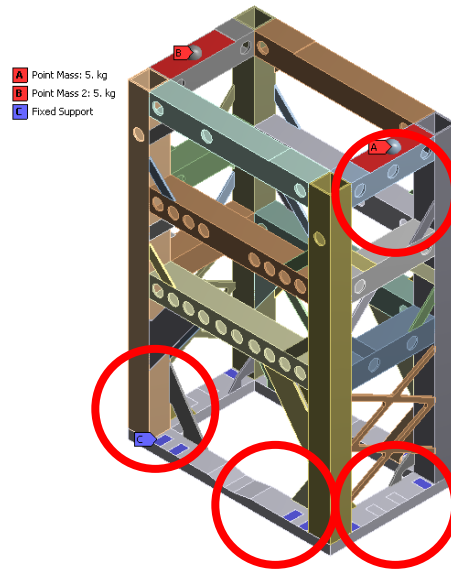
HLTS Structure Redesign (Case 7 – Outer Lower and Top Side Gussets Removed, Front and Rear “Mouse-Holes” Removed)
